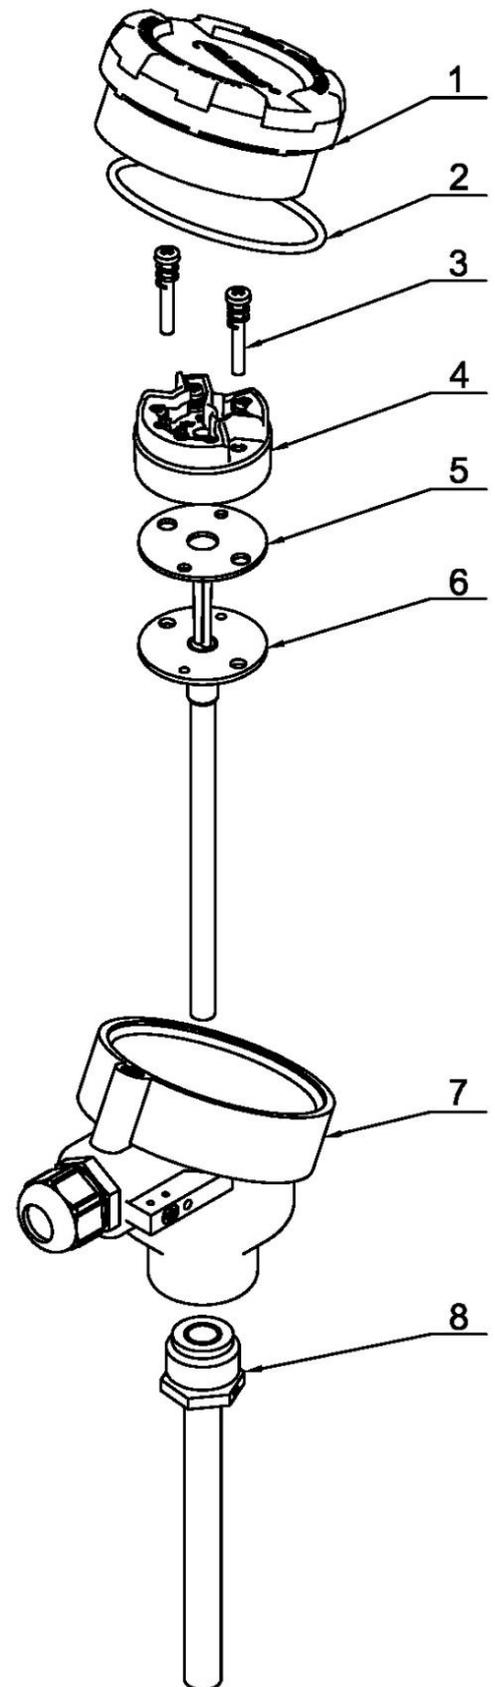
Mounting the LI-24G transmitter in the exemplary Aplisens connection head
